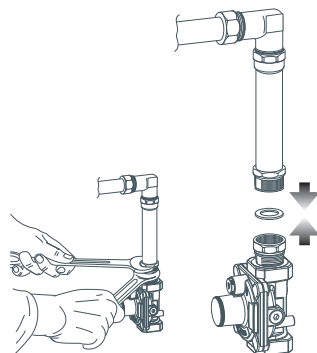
Connecting the gas pressure regulator assembly to the extension pipe
